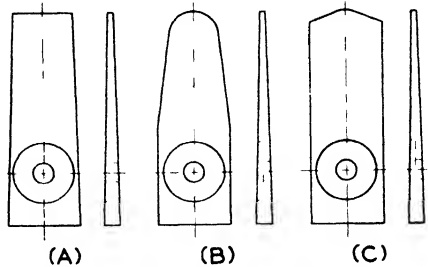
Three Types of Tooth-Rest Blades Commonly Used in Cutter Sharpening
